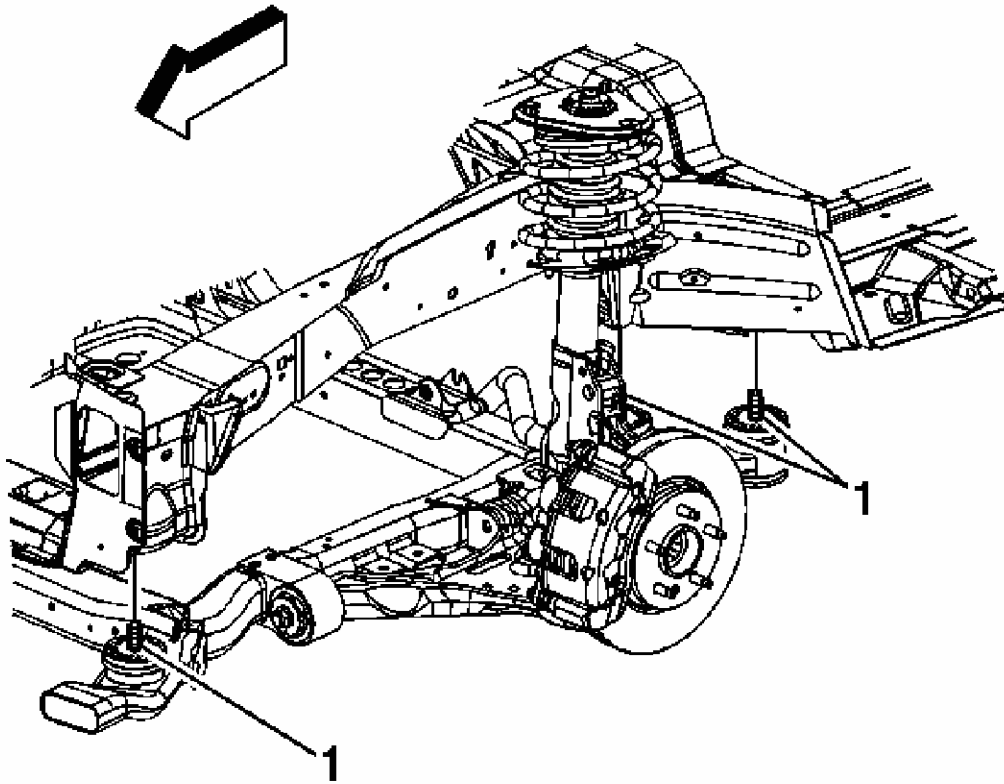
Identifying Rearward Engine Frame-To-Body Bolts
